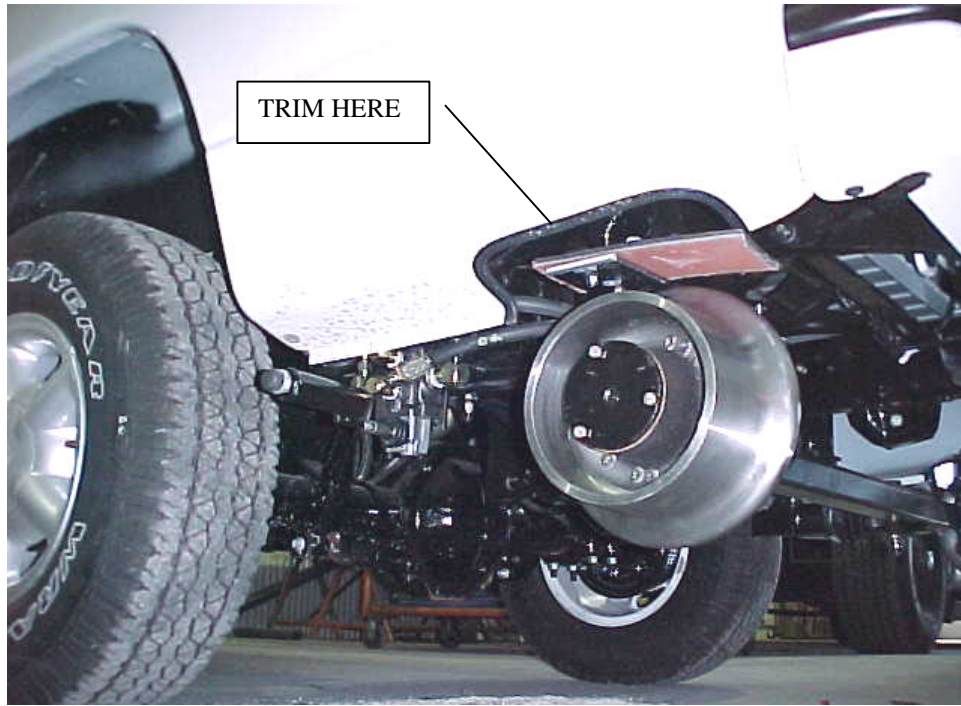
DURANGO REAR BUMPER TRIMMING
